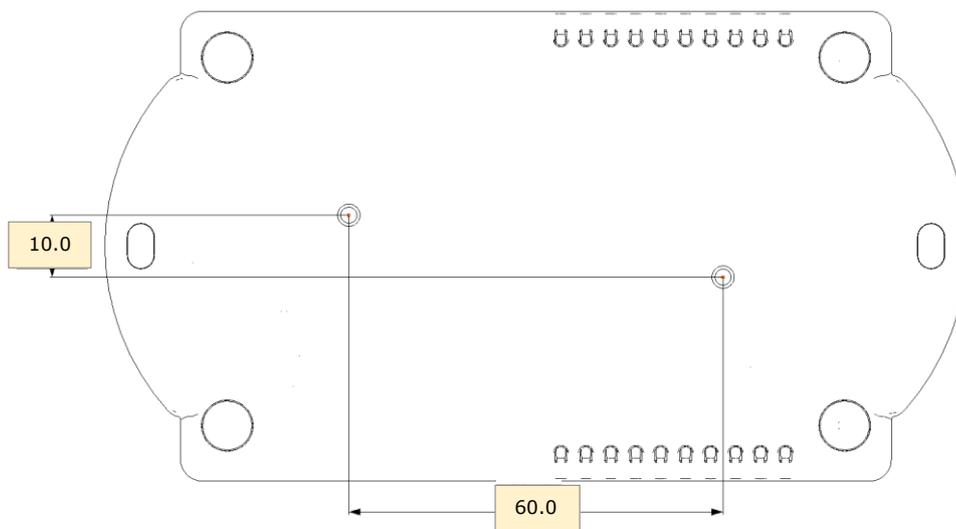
LDSBus Trailing Edge Light Dimmer Dimension – Bottom View
